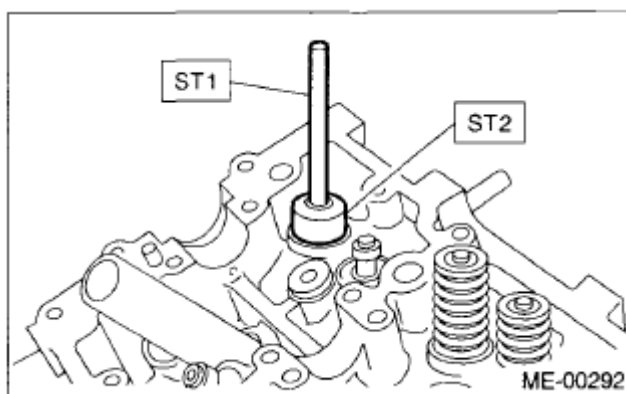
Inserting ST1 Into Valve Guide Using Valve Guide Remover
